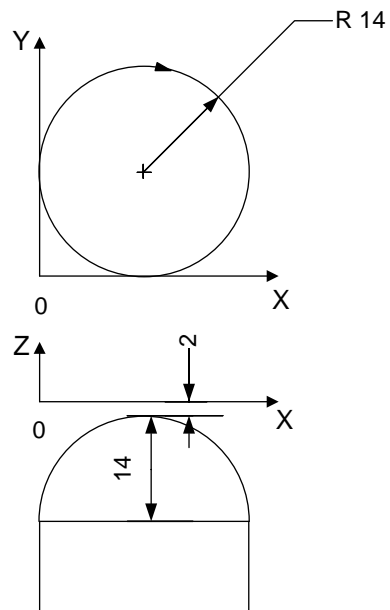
Sketch 6 of Workpiece Machining Process
